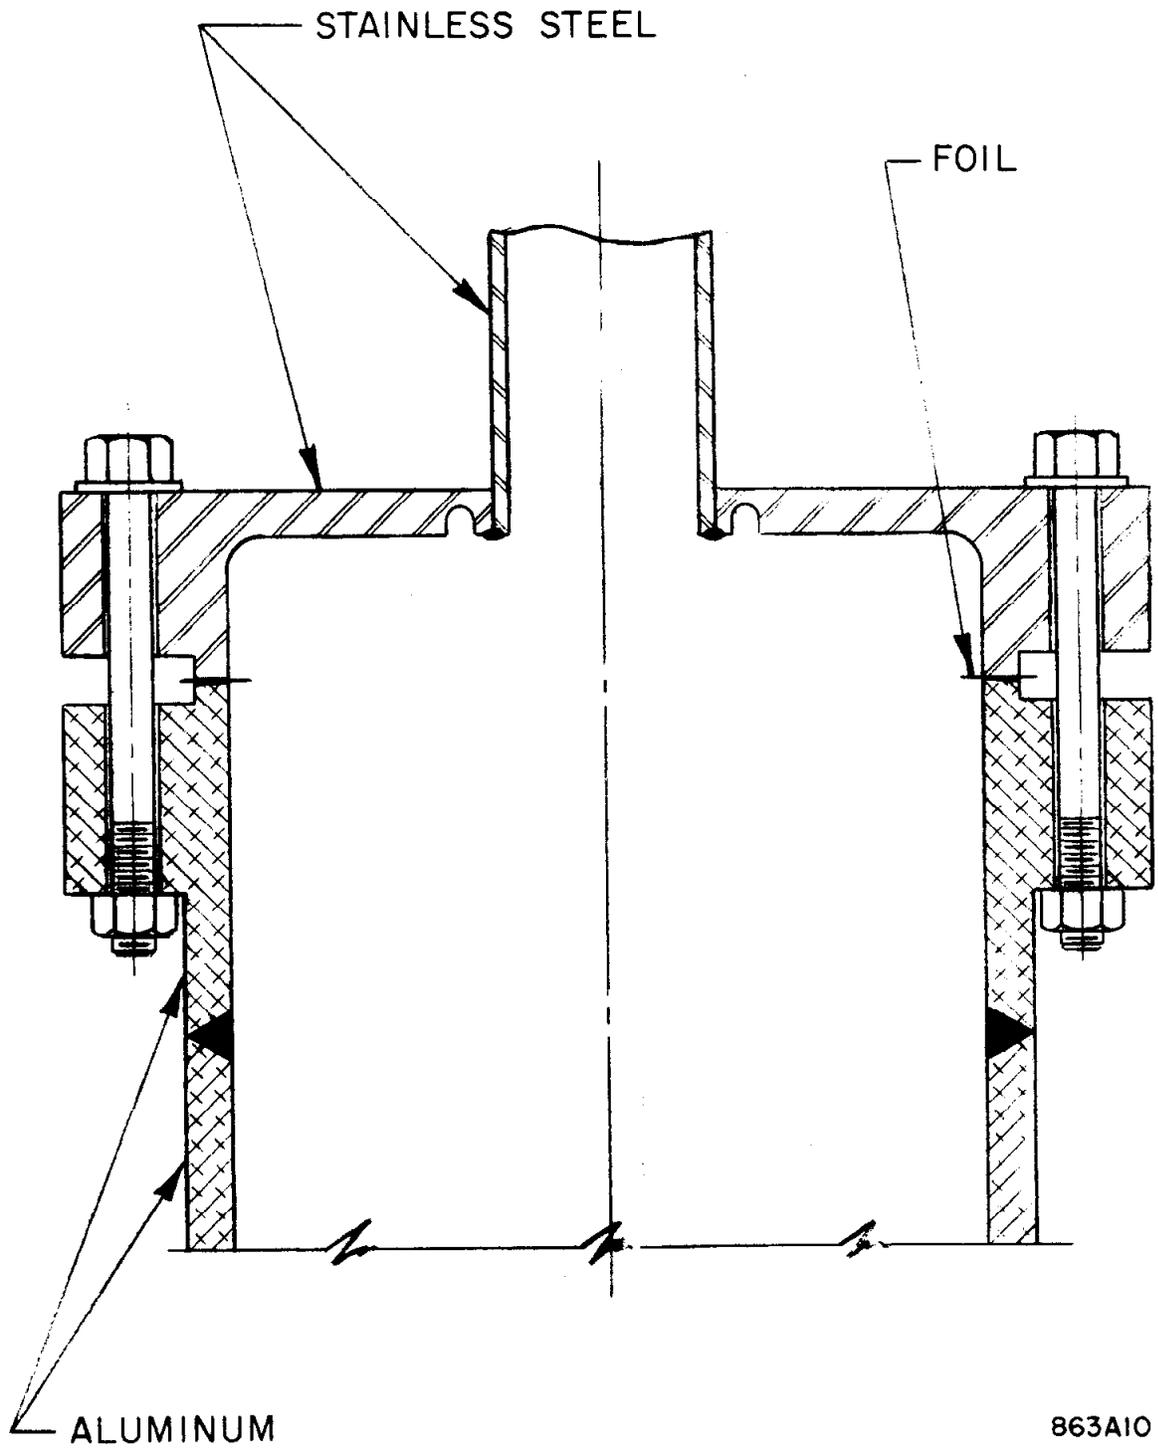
ULTRA-HIGH VACUUM FLANGE ASSEMBLY
